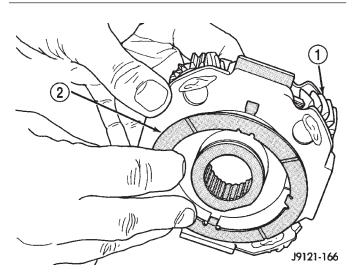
Installing Rear Thrust Washer On Front Planetary Gear
